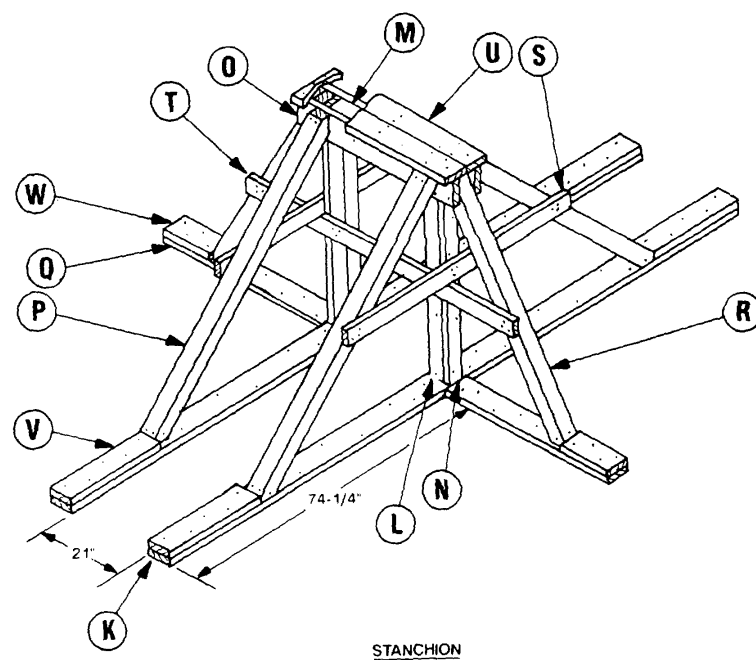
Forward support blocking assembly for van-type semitrailer-mounted components.
